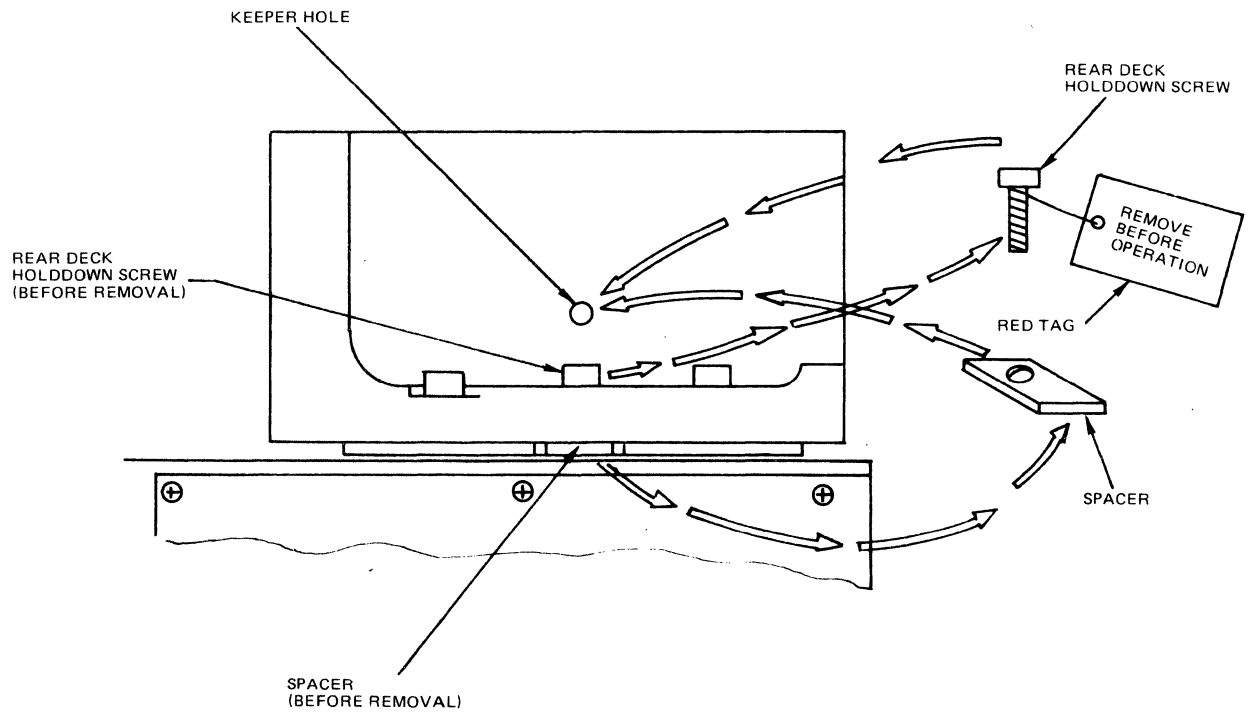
Removal of Rear Deck Holddown Screw and Spacer
